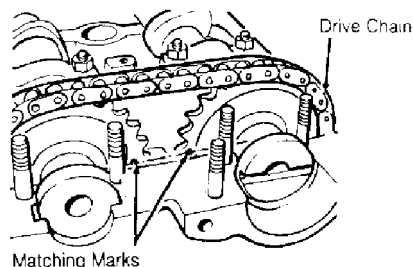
Aligning Camshaft Gears & Drive Chain (16-Valve)
